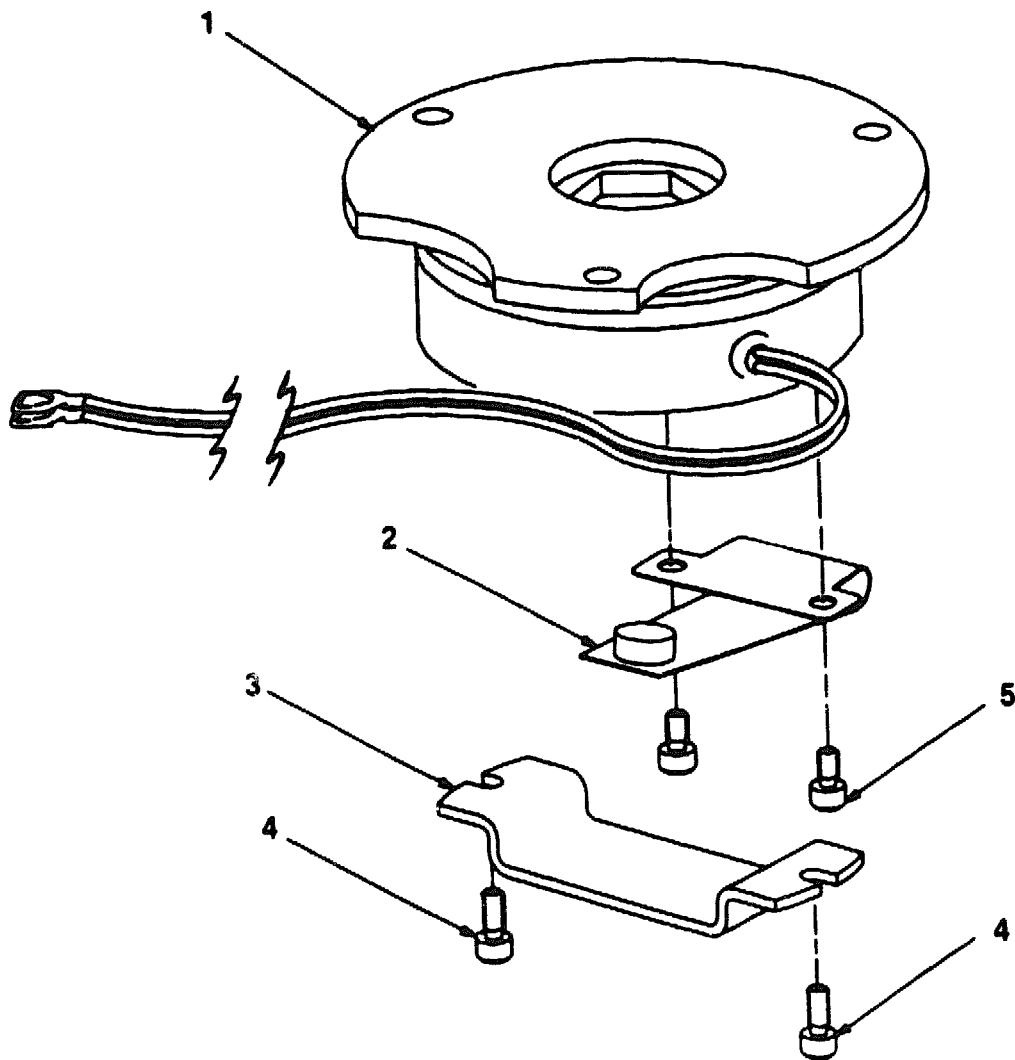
Head Disk Assembly (Sheet 2 of 3)
